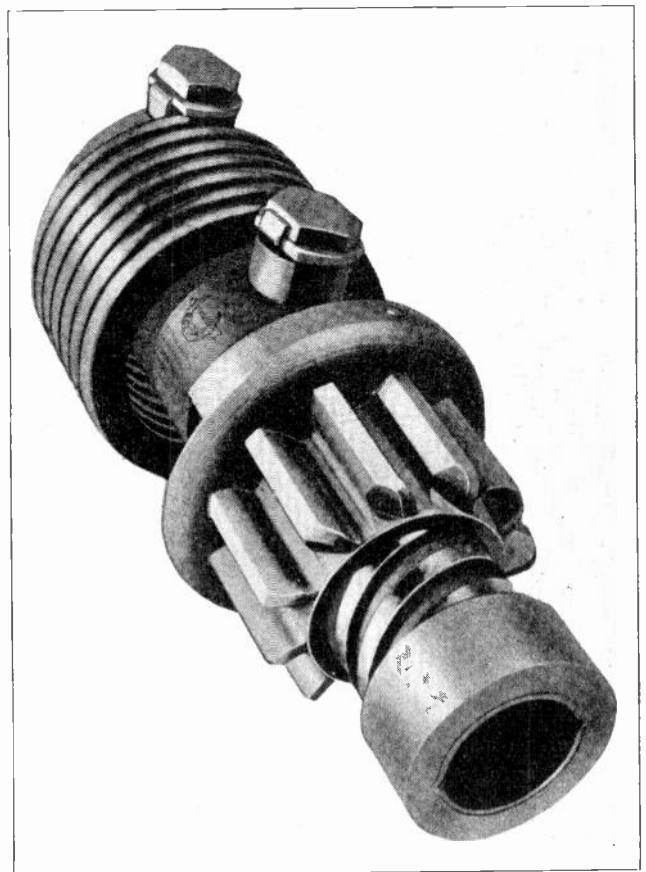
Photograph view of Bendix drive mechanism showing spring, sleeve, and pinion.
